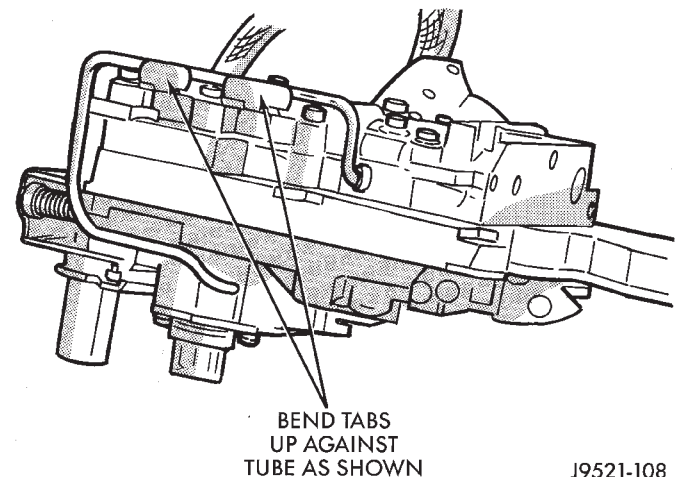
Securing Boost Valve Tube With Brace Tabs
